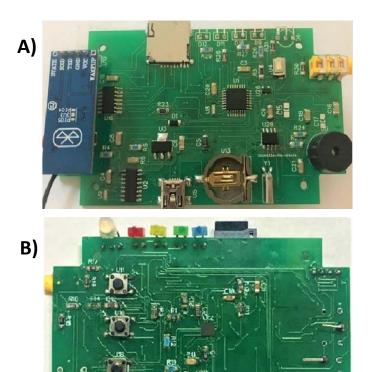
A) Printed circuit board (Custom PCB) top view, and B) bottom view.
